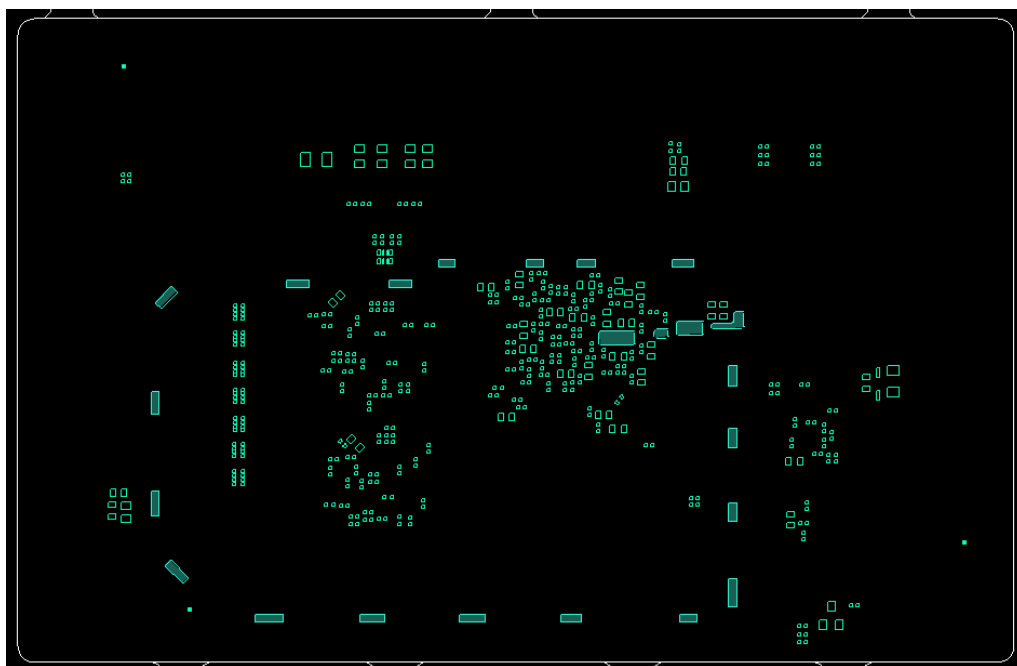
Shield cover at the bottom side of the Hi3798M DMO1B board
